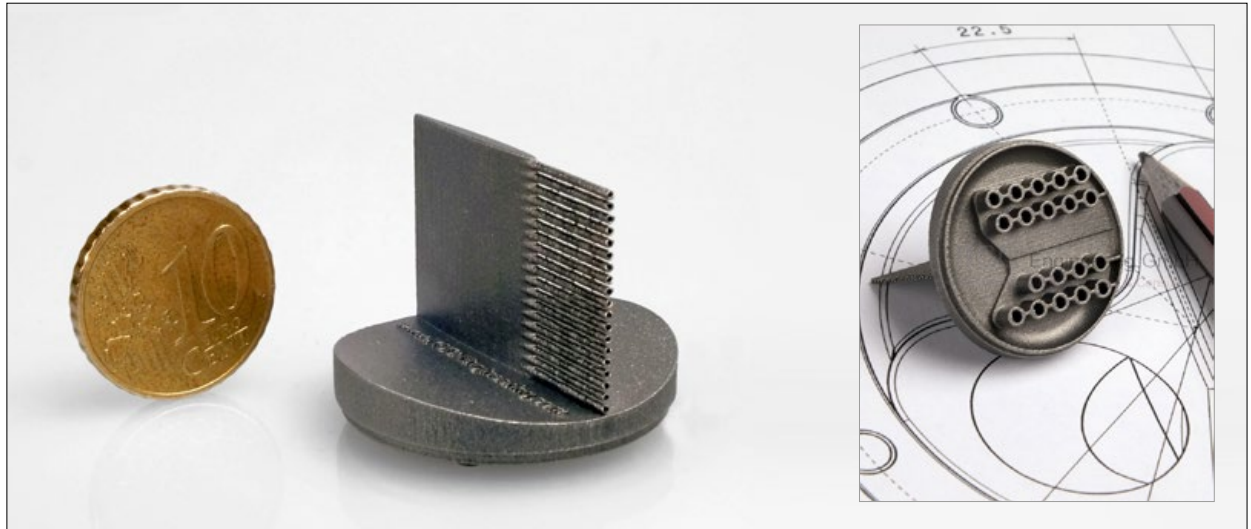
This PITOT probe, with 19 measurement positions, was manufactured in one step, including all sampling channels (Courtesy RSC Engineering GmbH)
